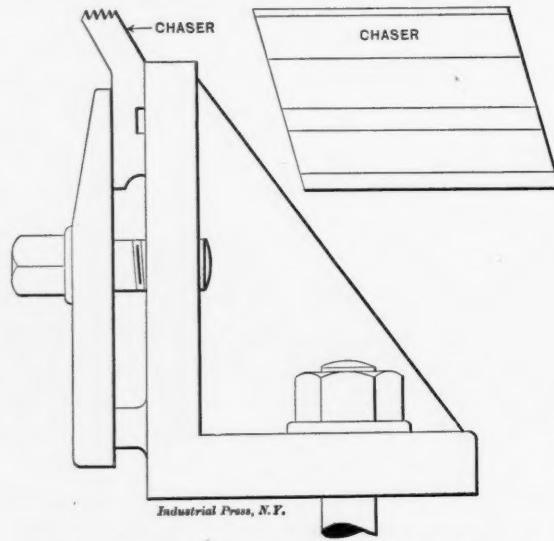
Fixture for Hobbing the Pratt & Whitney Chaser.
